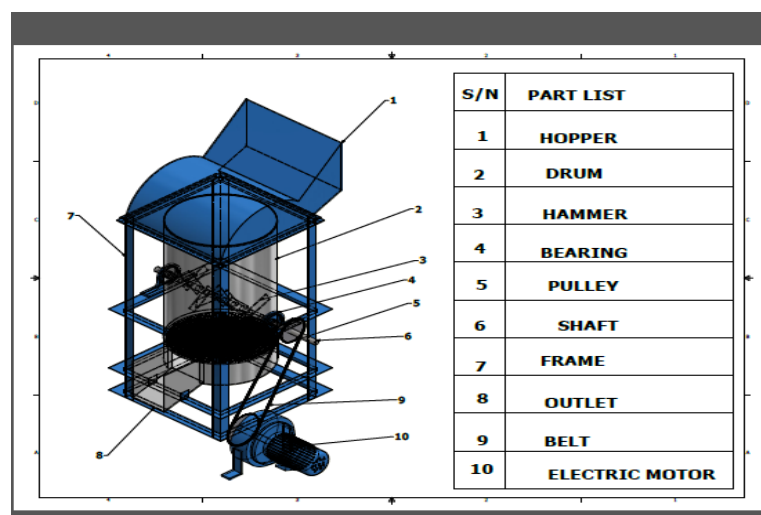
The Fabricated broken blocks pulverizing Machine
